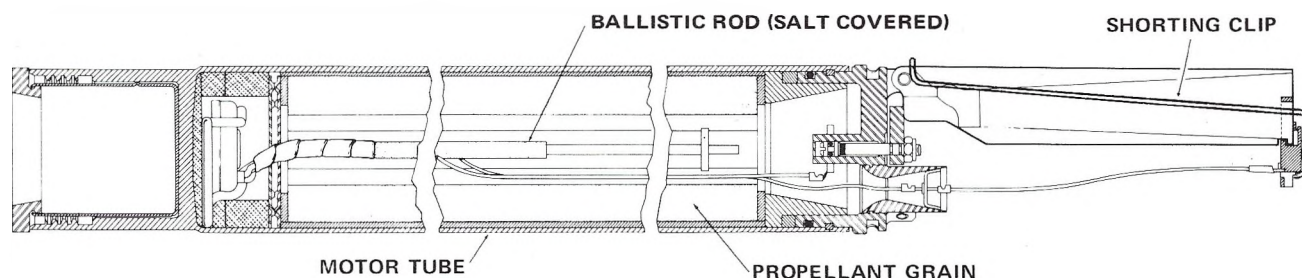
Mk 4 Mod 8 Rocket Motor Configuration
